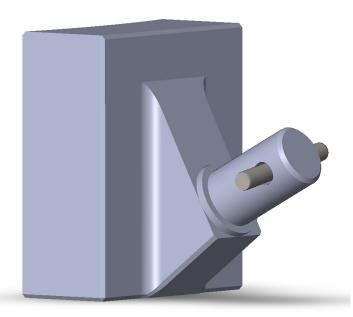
Load cell replacer with arm clamp and pivot ball removed
